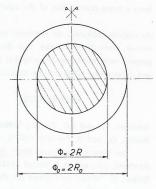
Cross section of cylindrical rod with external circular crack.
